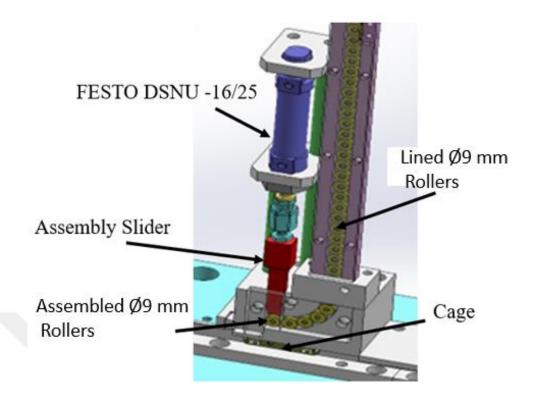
Magazine of Ø9 mm Roller Assembly Unit
